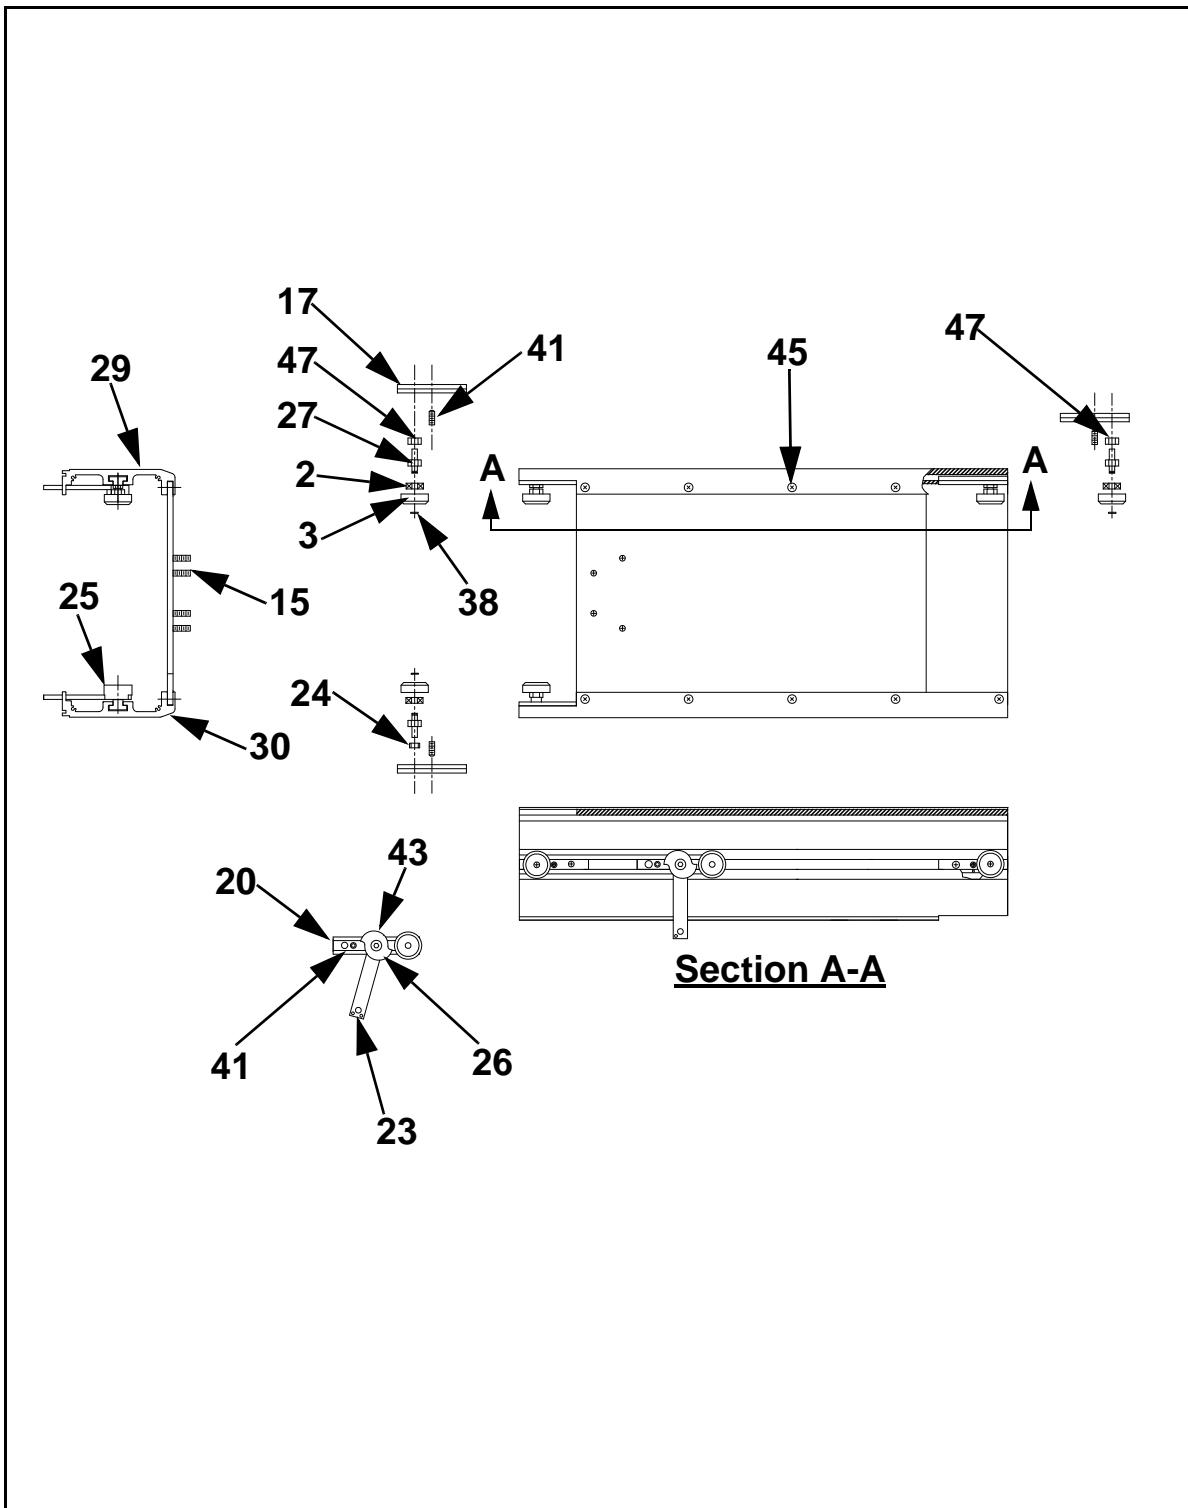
Vertical Carriage & Frame Assembly (Sheet 1 of 2)
